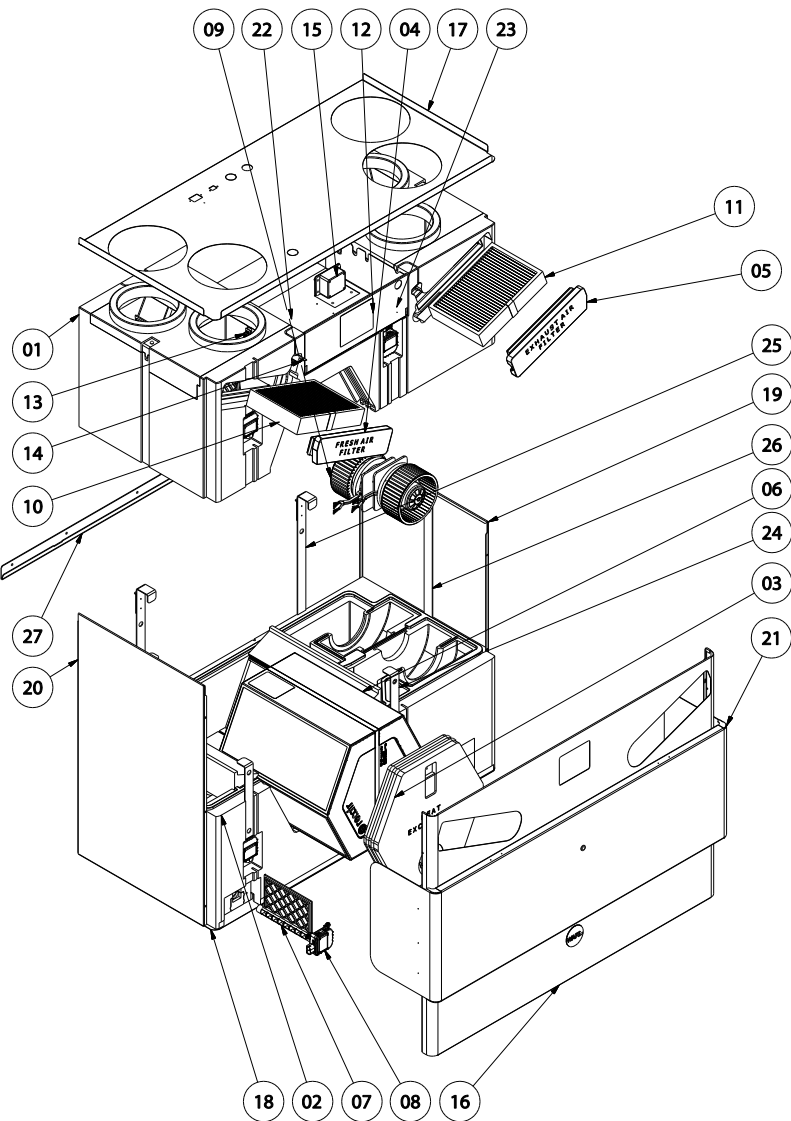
Exploded-view drawing of the unit with decorative pull-out cover.
